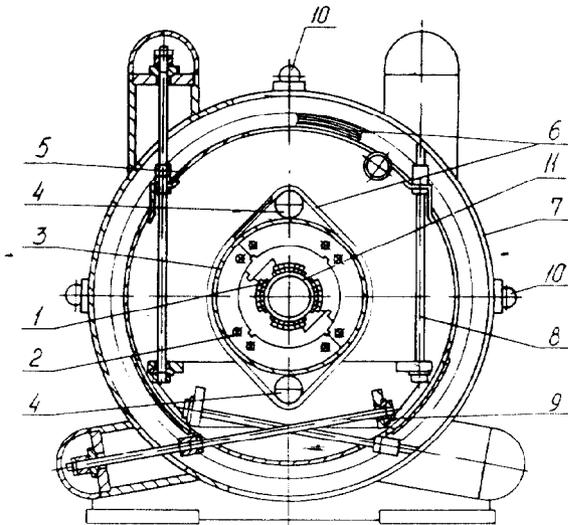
Cross sectional view of a SC quad assembled in a force-circulating cryostat: 1 - coil, 2 - magnet shield, 3 - helium vessel, 4 - two-phase helium pipe, 5 - thermal shield, 6 - superinsulation, 7 - vacuum shell, 8 - suspension, 9 - extension rod, 10 - geodetic marks, 11 - ion pipe.
